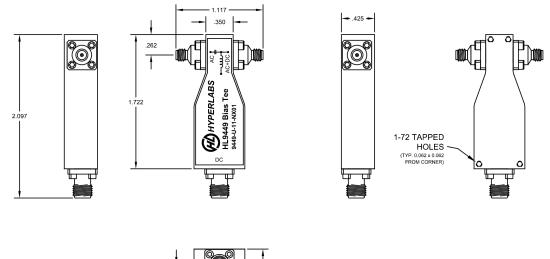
HL9449 with DC bias pins Mechanical Drawing
